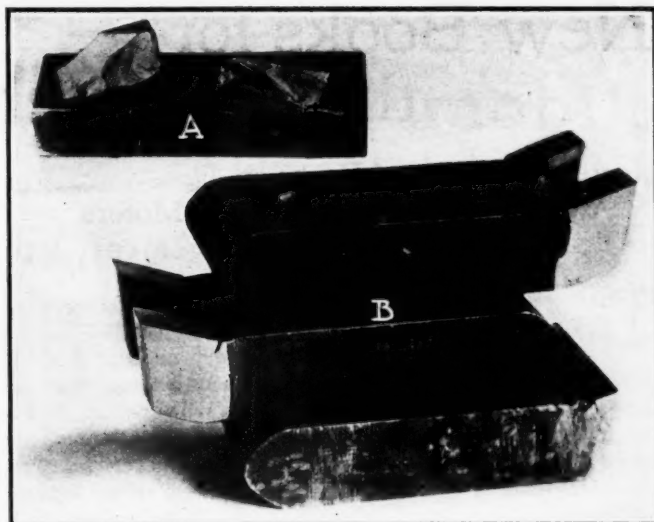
A—Showing how high speed steel broke before the weld. B—Three cutting tools for a Lodge & Shipley crankshaft turning machine. The shank is low carbon steel costing 3 cents per pound
